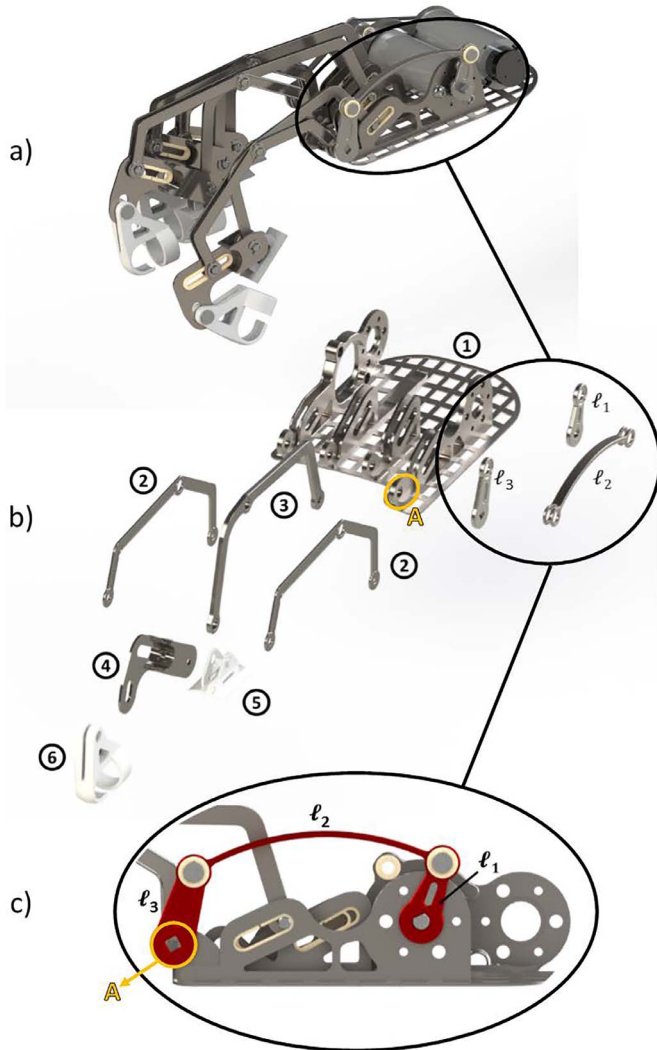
(a) Designed HES; (b) exploded view drawing; (c) particular: four bar linkage elastic transmission (described in the following).
